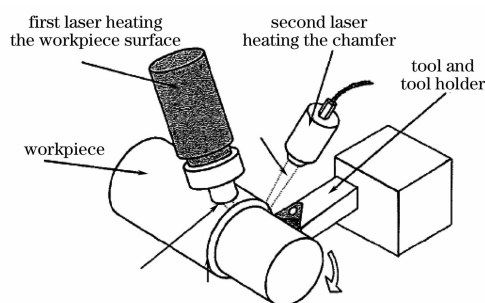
Laser assisted turning utilizing two laser units^[22] automatically reduce the tool wear^[18].
